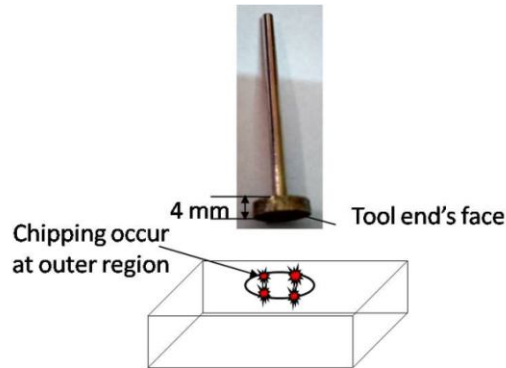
Criteria of drilling by a Flat cylindrical tool ($Height < Diameter$)
